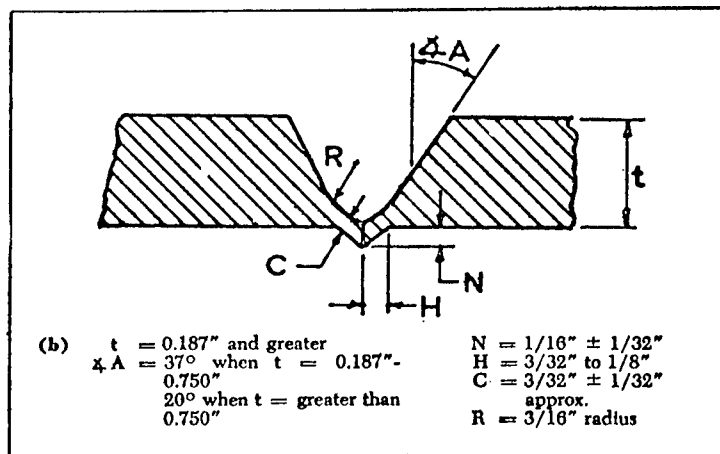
Various styles of butt joints and dimensional ranges used for inert-gas-shielded tungsten-arc welding of pipe.
